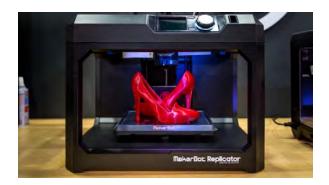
Example of 3D Printing Machine (www.tested.com)
